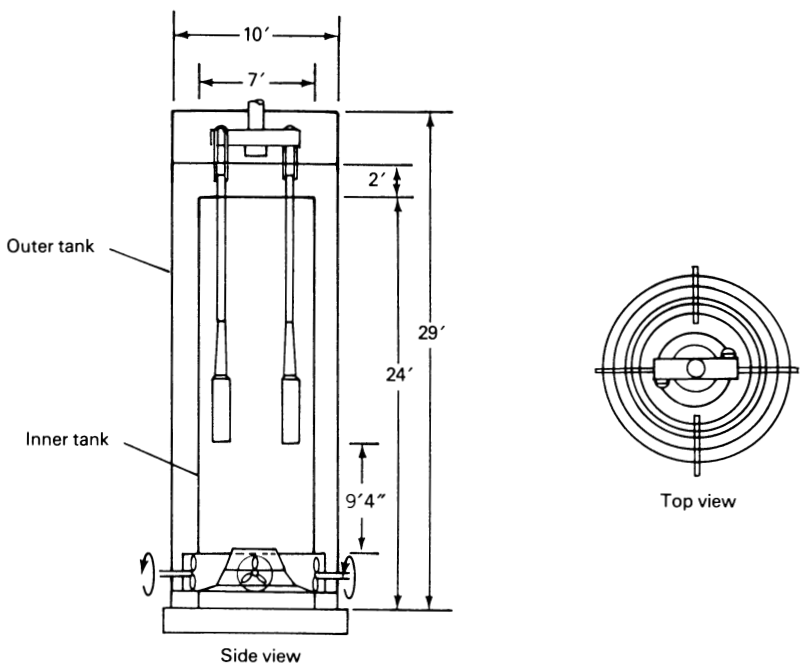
Deep cylindrical tank for quenching long axles and shafts
